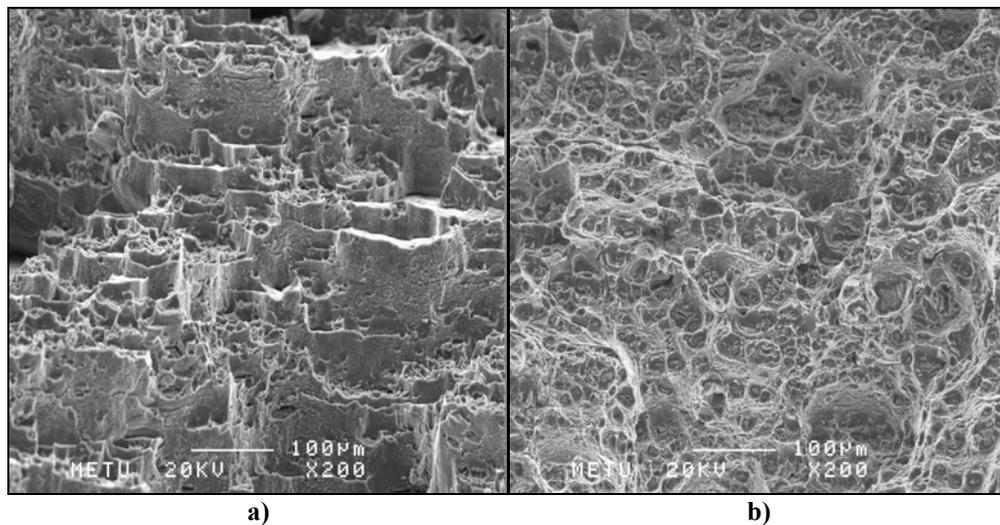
Fracture surfaces of impact specimens aged at 190°C a) for 7 h (45 J), b) for 13 h (15 J)
